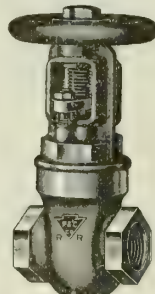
Screwed Rising Spindle 150 lbs. pressure
